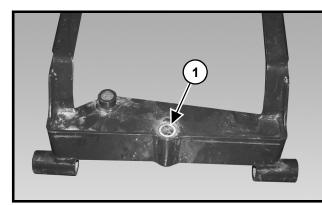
Remove Snow Blade Angle Pivot Bushings
